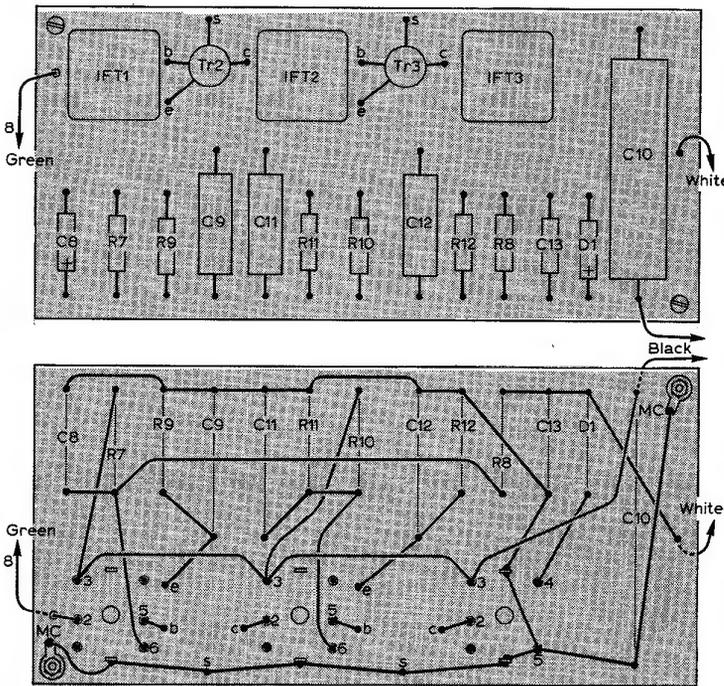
Component layout and wiring details of the i.f. circuit board $3\frac{1}{2} \times 1\frac{1}{2}$ in.
